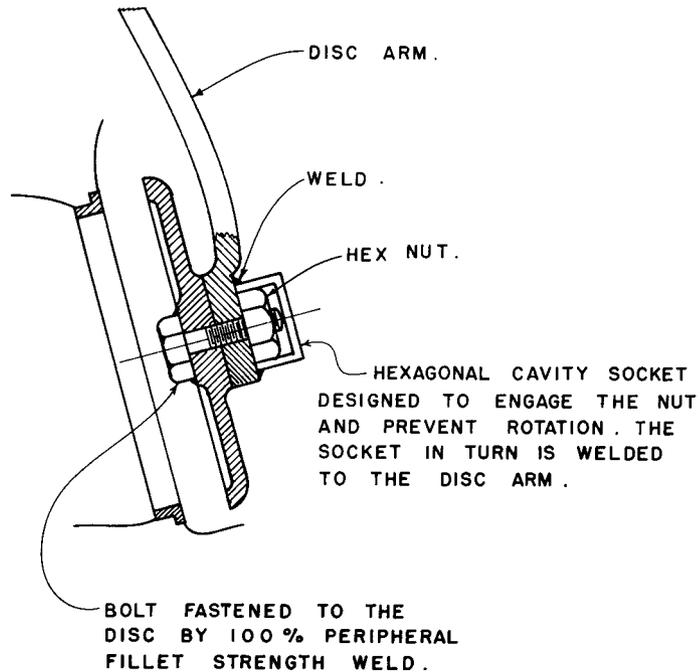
Welded Self-Capturing Locking Device for Use in Primary Coolant Systems.
